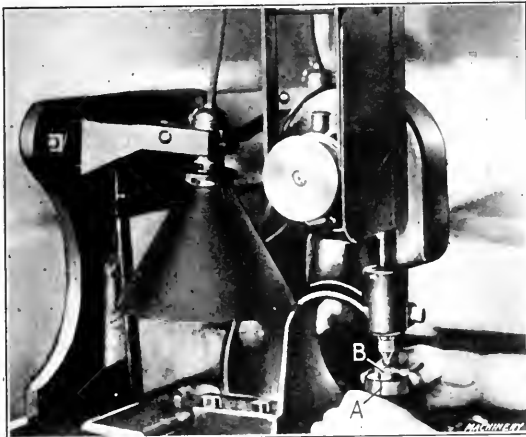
Riveting the Odometer Dials onto the Gear Clusters
